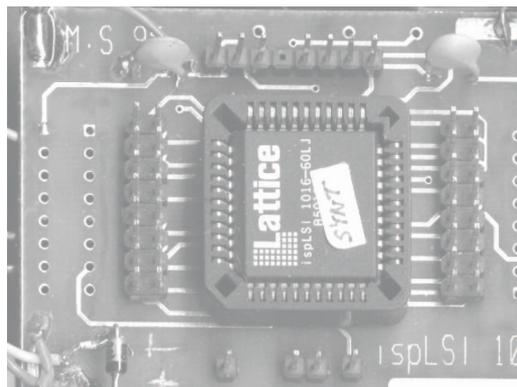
PC board of realized synthesizer, based on isp-LSI1016. PC board size: 60 x 45 mm
